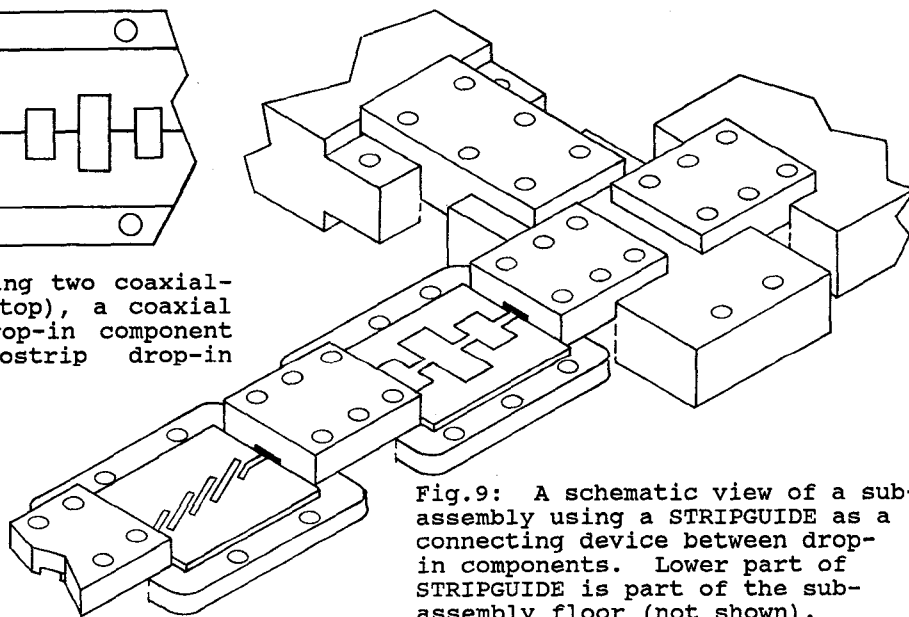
A schematic view of a sub-assembly using a STRIPGUIDE as a connecting device between drop-in components. Lower part of STRIPGUIDE is part of the sub-assembly floor (not shown).
